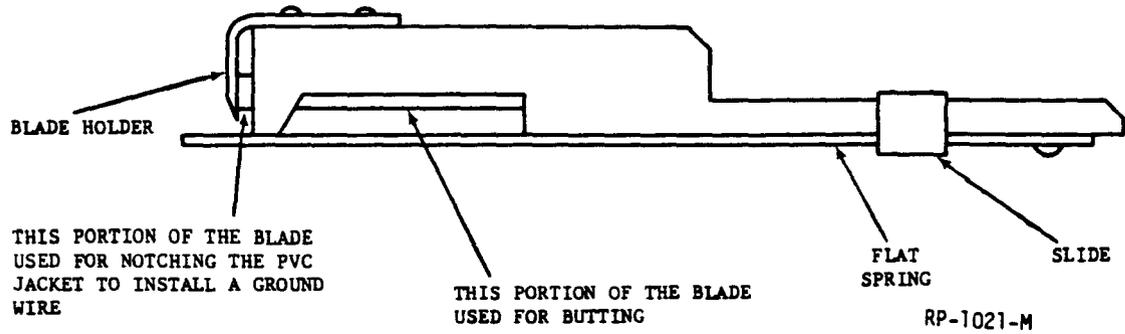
R-4447 ABAM CABLE BUTTING TOOL
